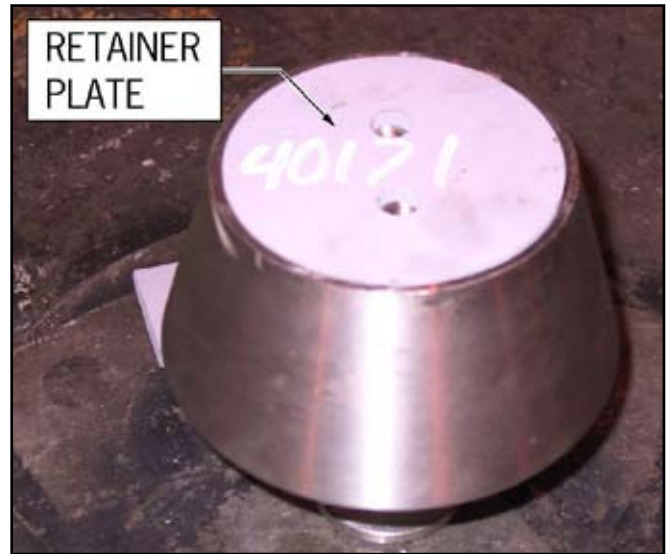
Pipe Rack Roller Retainer Plate.
